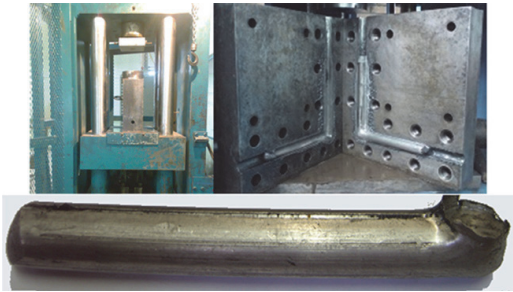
Hydraulic press, ECAP die and AL billet after one pass pressing.
